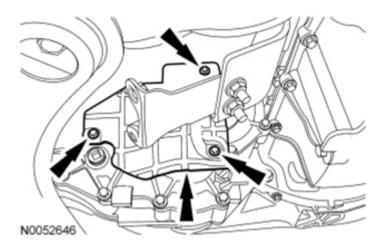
Locating PTU Heat Shield And Bolts Courtesy of FORD MOTOR CO.
